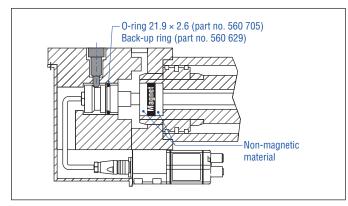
Mounting example of pressure fit flange »S« and sensor electronics with side cable entry
